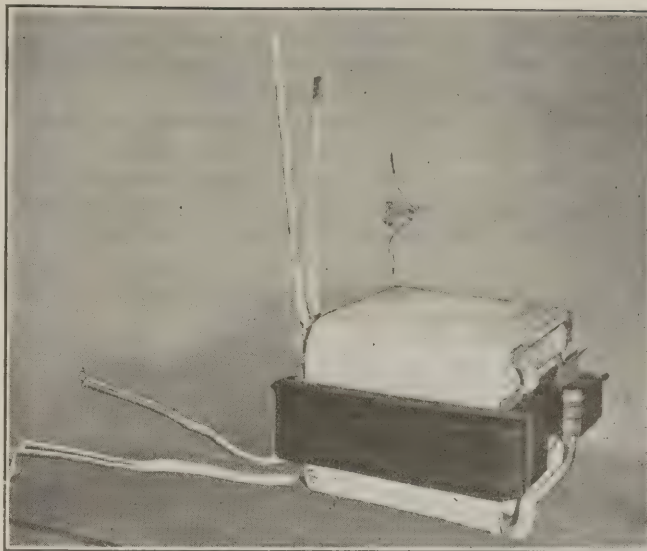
MAGNETIC CIRCUIT PARTLY ASSEMBLED
